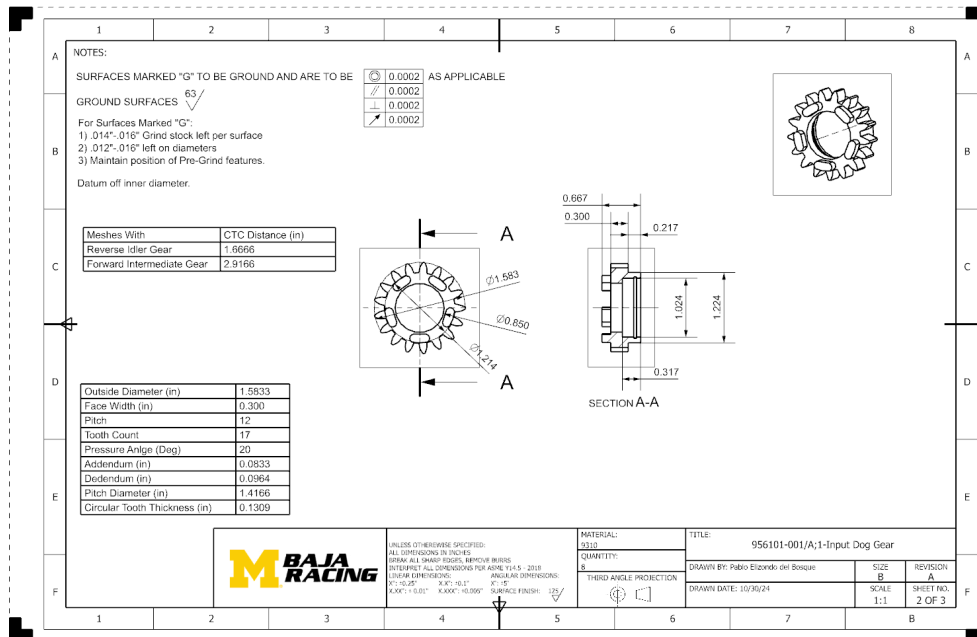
Part drawing of the input gear for KA-Wood to reference with important callouts of the gear teeth profile such as diameter, pressure angle, pitch, tooth count, and face width.
